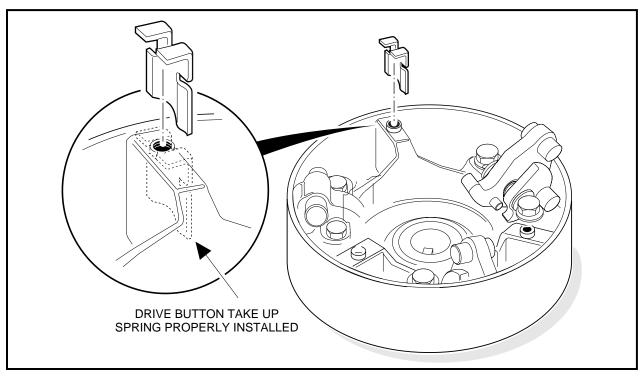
Correct Orientation of Drive Button Take-up Spring
